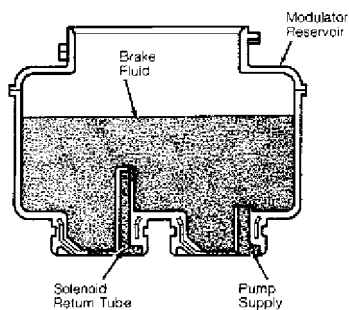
Locating Sol. Return Tube In Modulator Reservoir (Typical)
